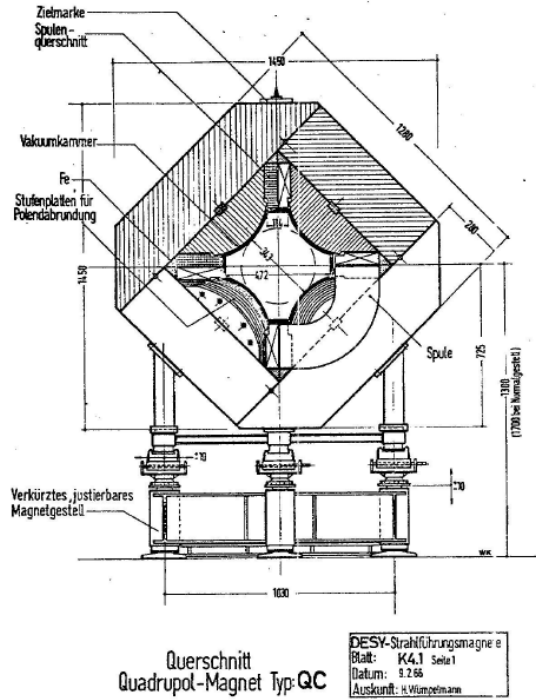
Technical drawing detailing the dimensions of a MICE quadrupole.
